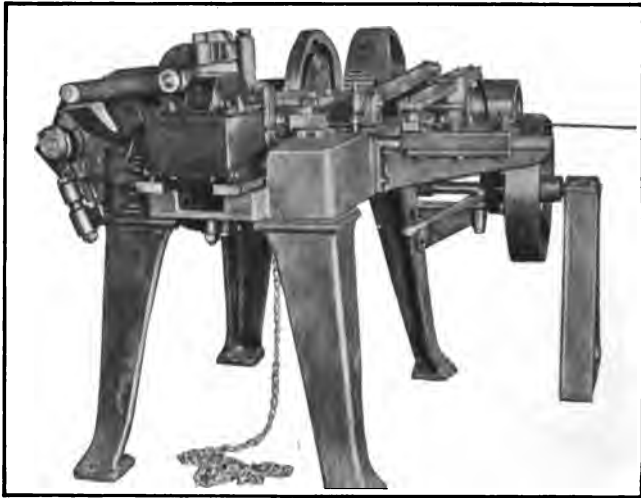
Form of Wire-straightener used on Machine shown in Fig. 17
